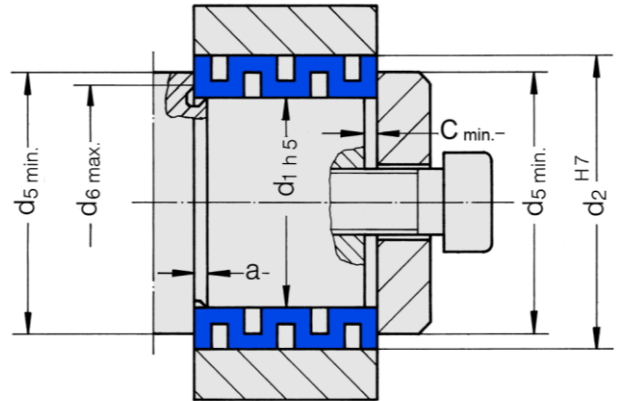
Sectional view of Spieth IK/IL clamping sleeves
